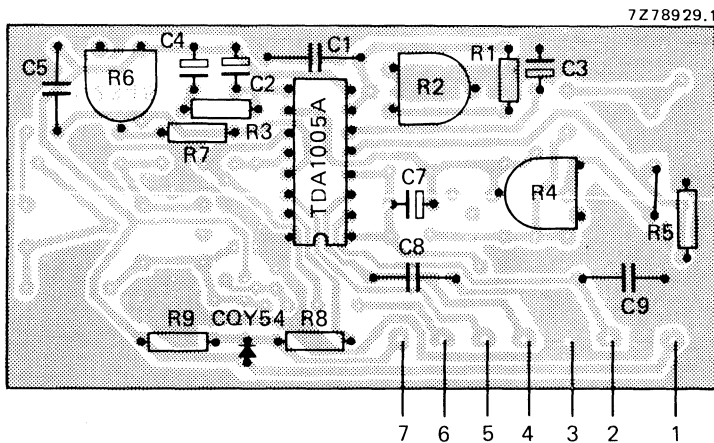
Printed-circuit board component side of a t.d.m. decoder, showing component layout. For circuit diagram see Fig. 10.
